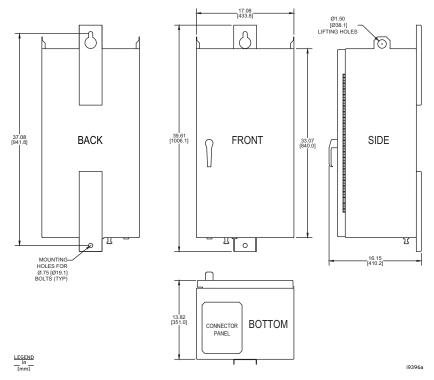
SEL-651R-2 Dimensions and Mounting Drill Plan (Single-Door Enclosure)
